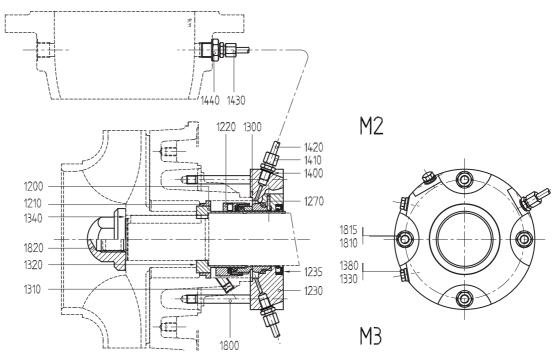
Mechanical seal M2-M3 - bearing group 4.
